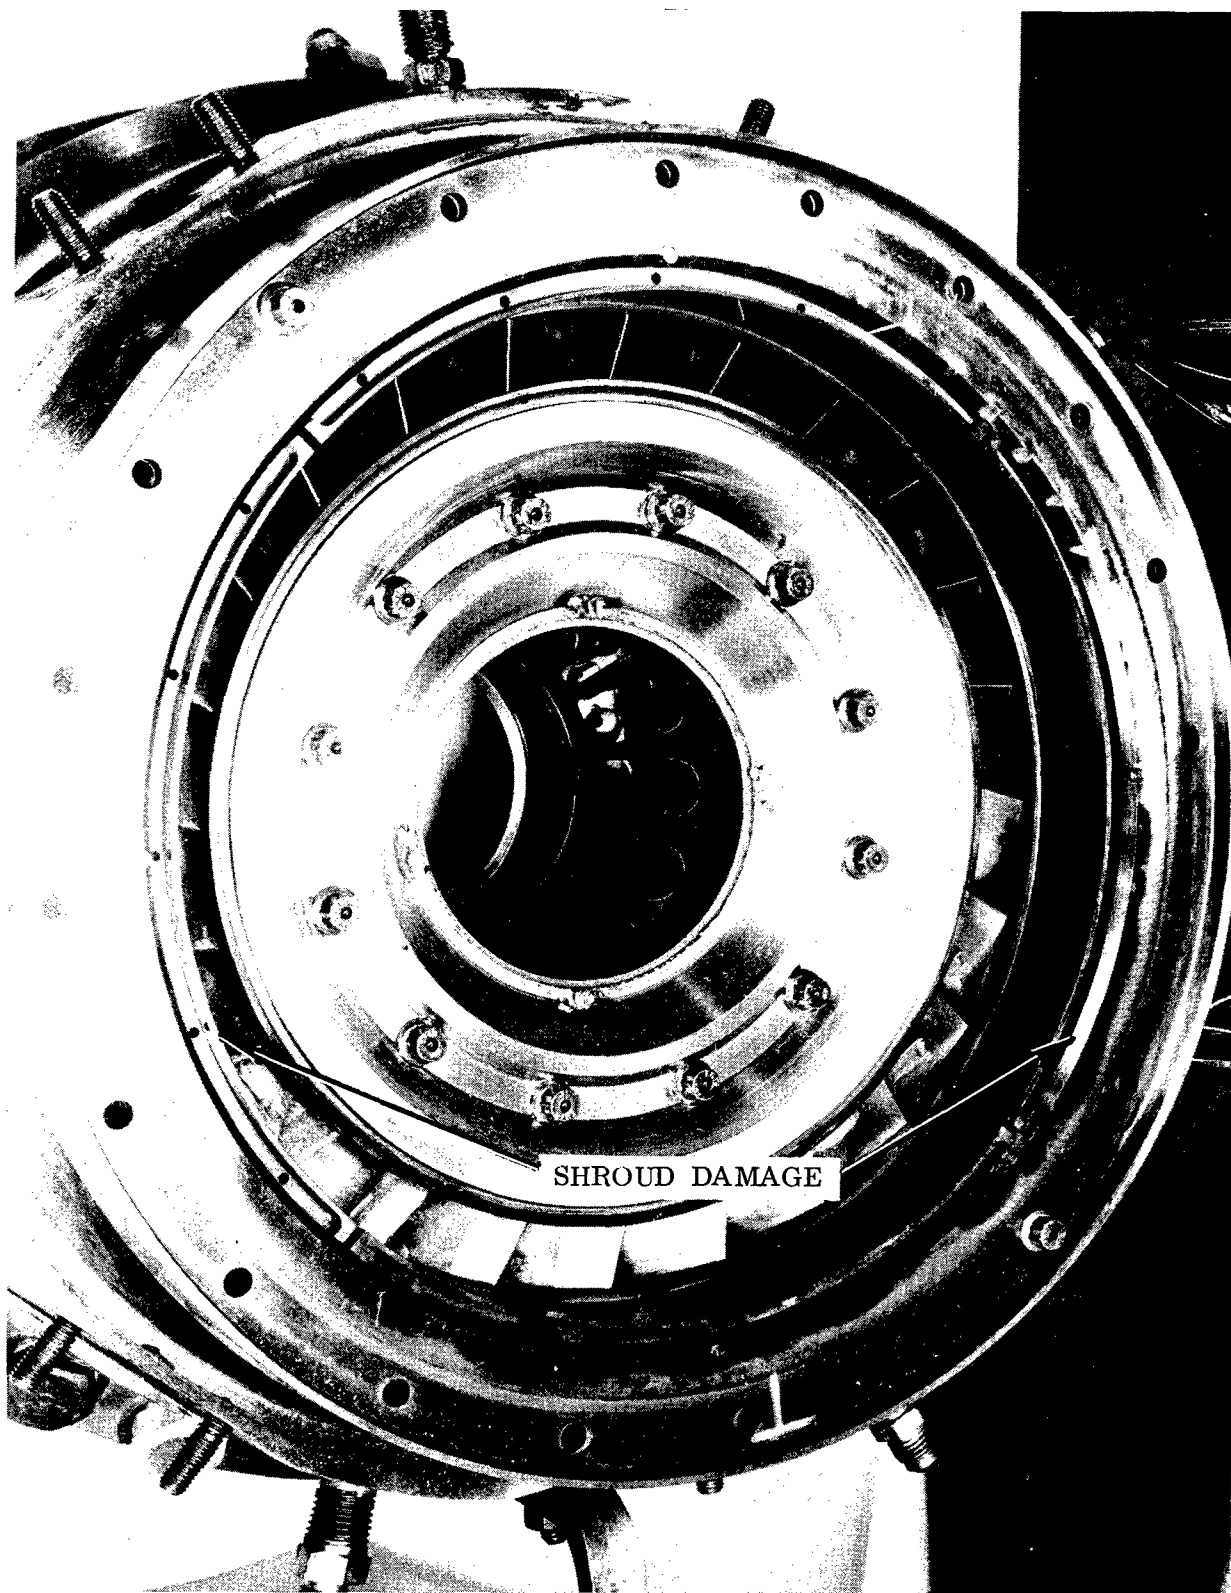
Turbine Shroud and Nozzle Vane Assembly.
